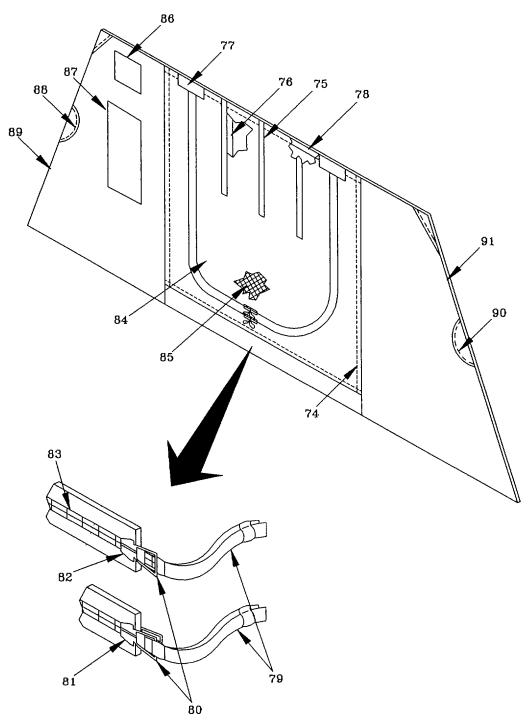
Tent Body Assembly (Sheet 5 of 7)
